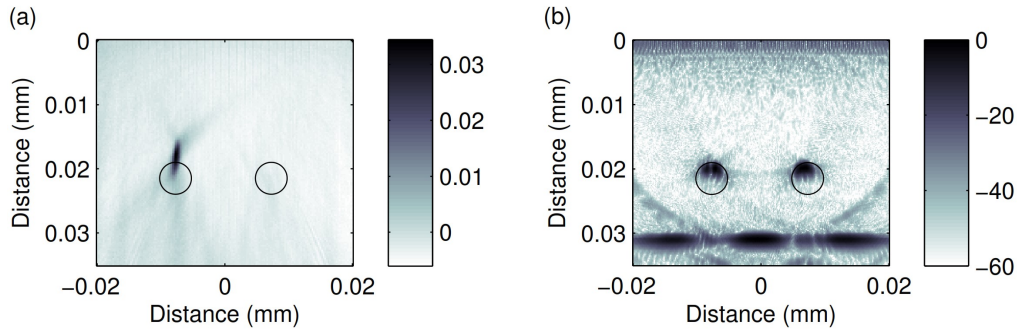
Images from Aluminium fatigue specimen with holes machined in good material and through crack, showing, (a) Nonlinear image, (b) High resolution linear TFM image.
